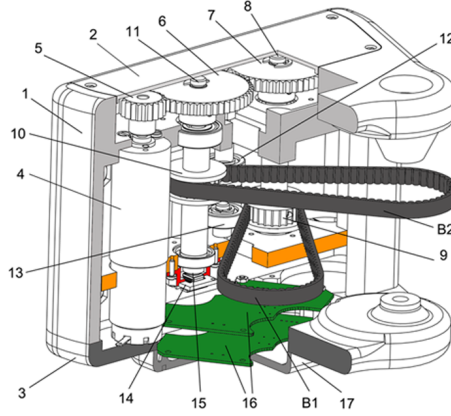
3D section of the palm. Transmission belts (B1) and (B2), gears (5), (6), (7), sensors (14) and (15) and electronic boards (16) are highlighted. One DoA can be added to the hand, decoupling the two finger motions, by mounting one more motor inside the palm frame (1), symmetrically to motor (4). In this configuration gear (8) must be inverted, avoiding the engaging with gear (6).
